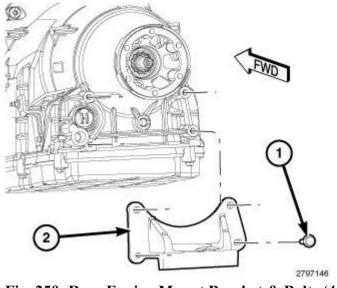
Rear Engine Mount Bracket & Bolts (4x2) Courtesy of CHRYSLER GROUP, LLC
